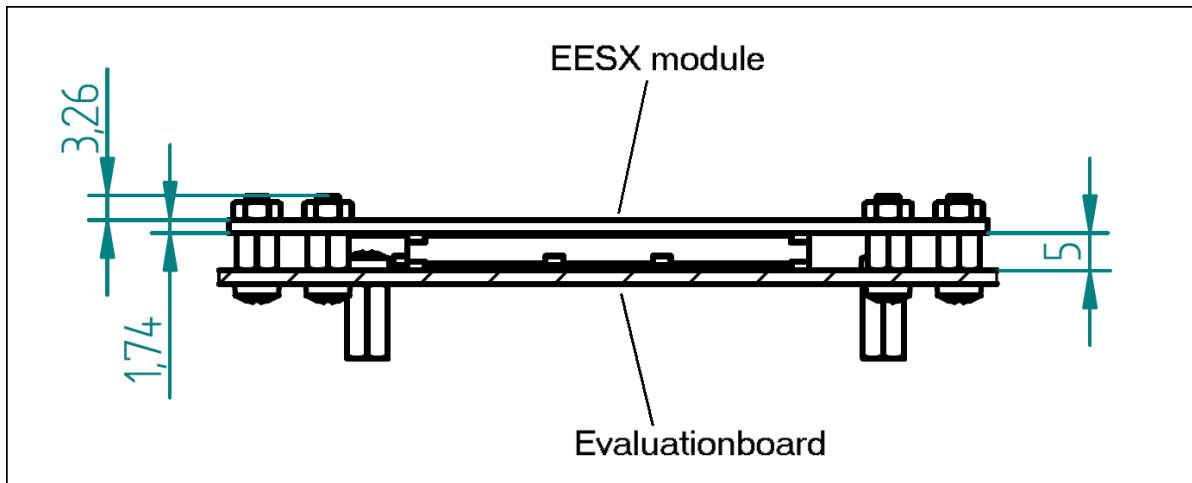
EESX module mounted on EESX-Evaluation-Board with screws and nuts; sectional drawing
